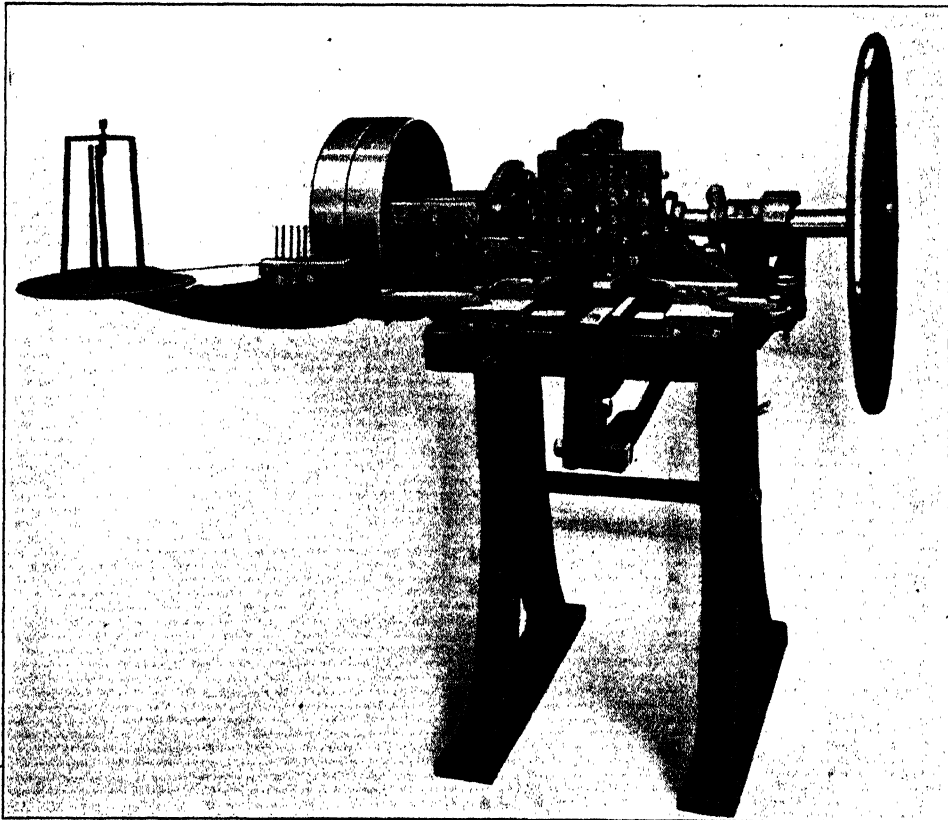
PAPER-CLIP MAKING MACHINE—E. WHITE.
